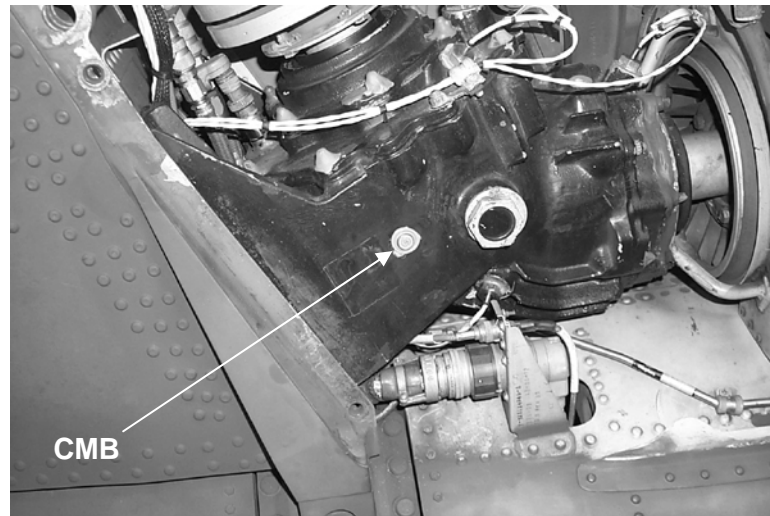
Intermediate Gearbox Assembly (AH-64A/D) with CMB Installed
